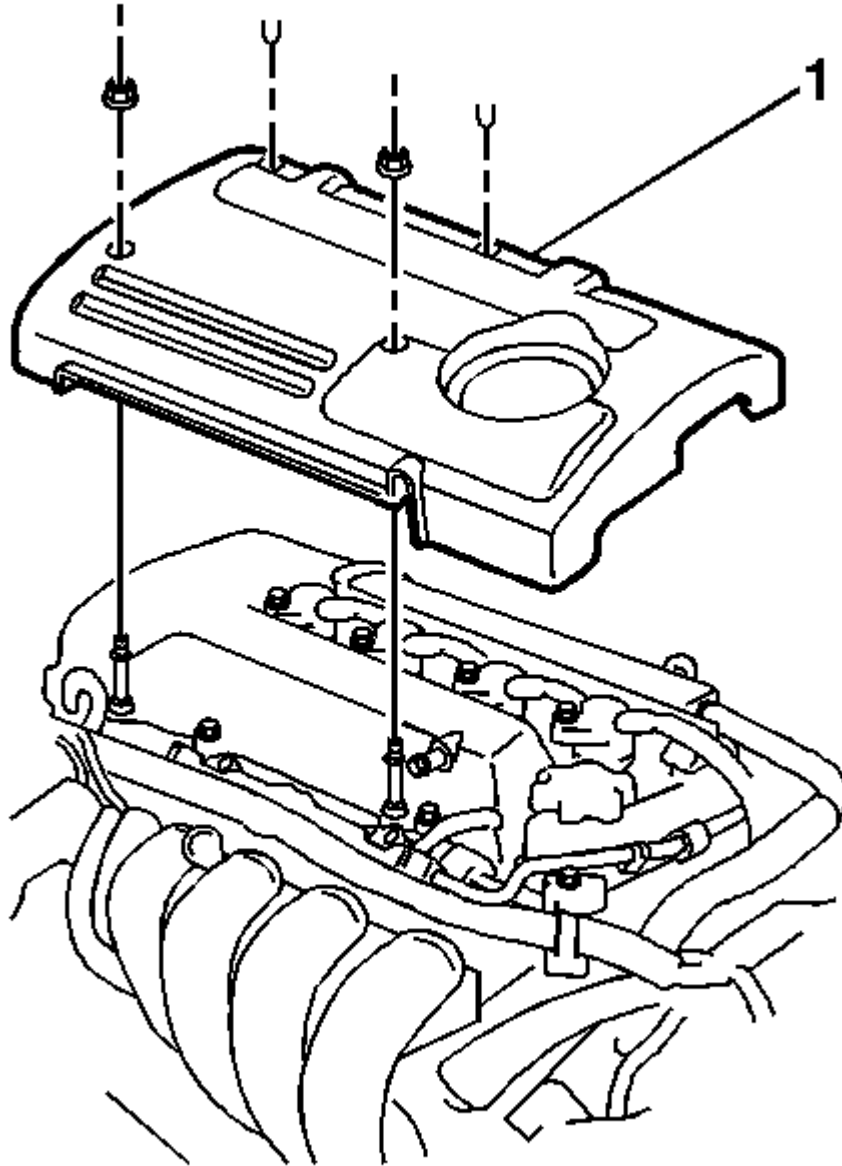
View Of Engine Top Cover, Plastic Retainers & Fasteners
